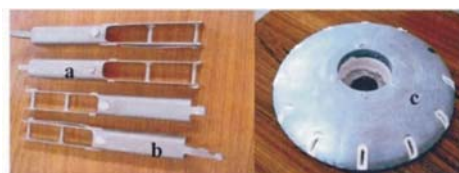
Investment cast (a) support arm (b) drive arm and (c) Top dome components
